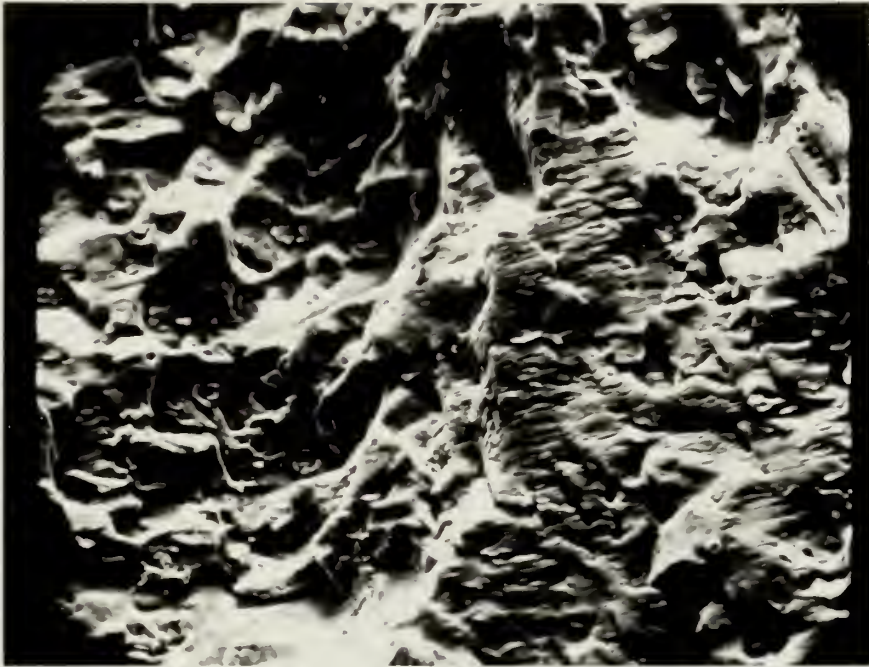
Inconel 625 weld metal fatigue fracture surface. 1250X.
